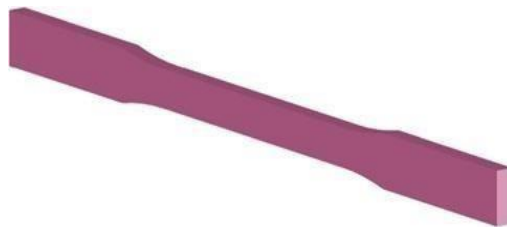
CAD Model of tensile test specimen as per ASTM ISO 527-2
